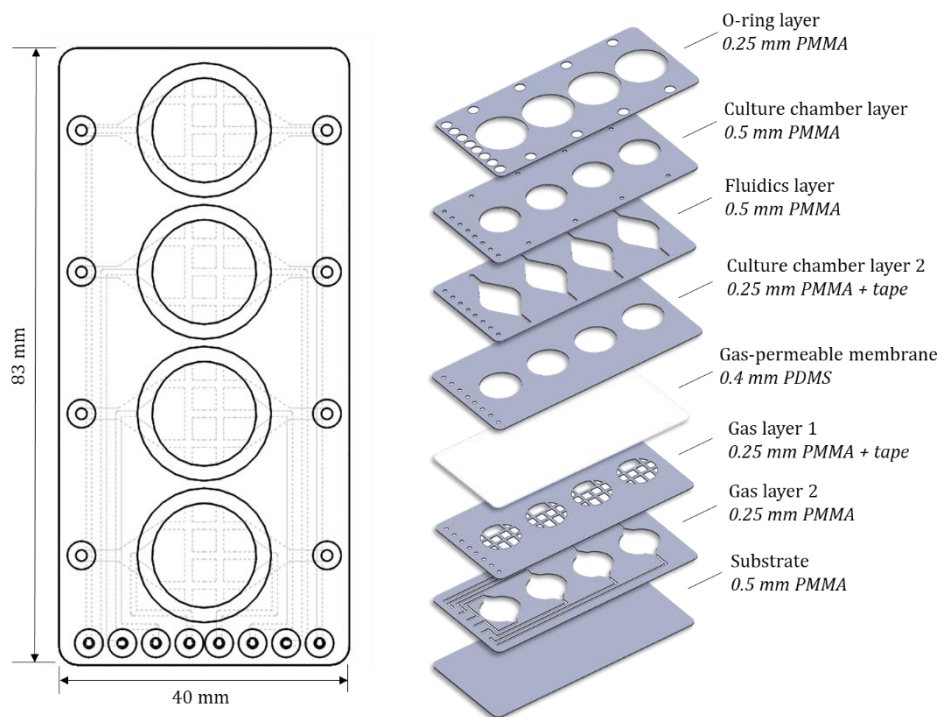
Exploded view and description of the layers comforming the device (device v4).
